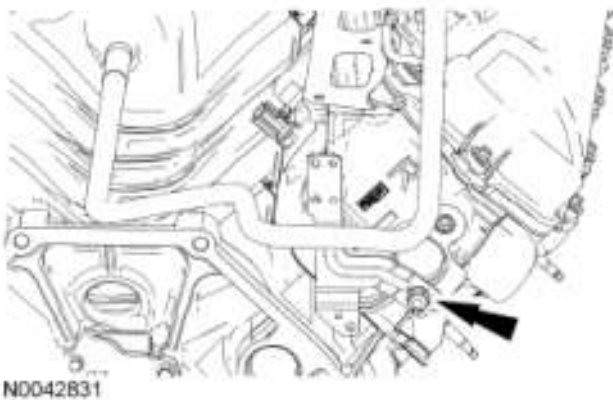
Locating Knock Sensor (KS) Electrical Connector
